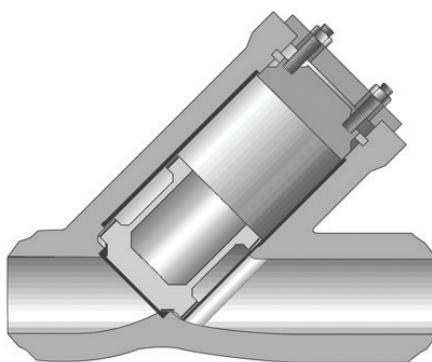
BY "Y" Pattern Stop-check, Butt Weld Ends
